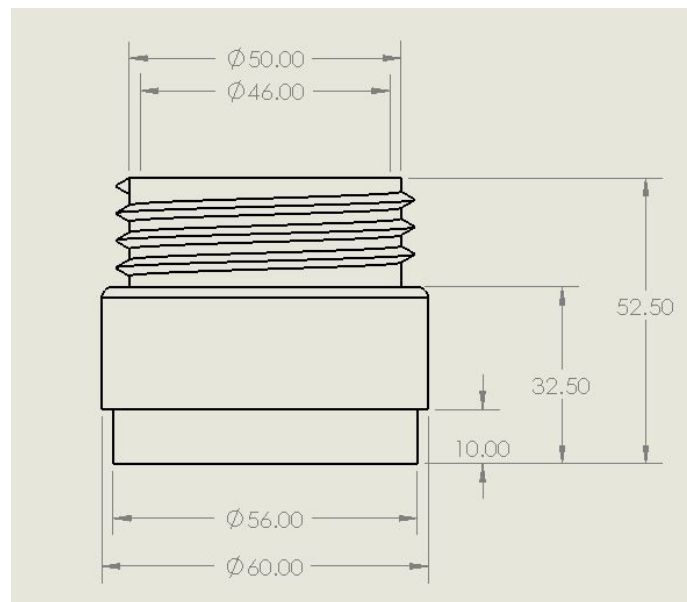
Midsection of Shell with Slip Joint and Threading
